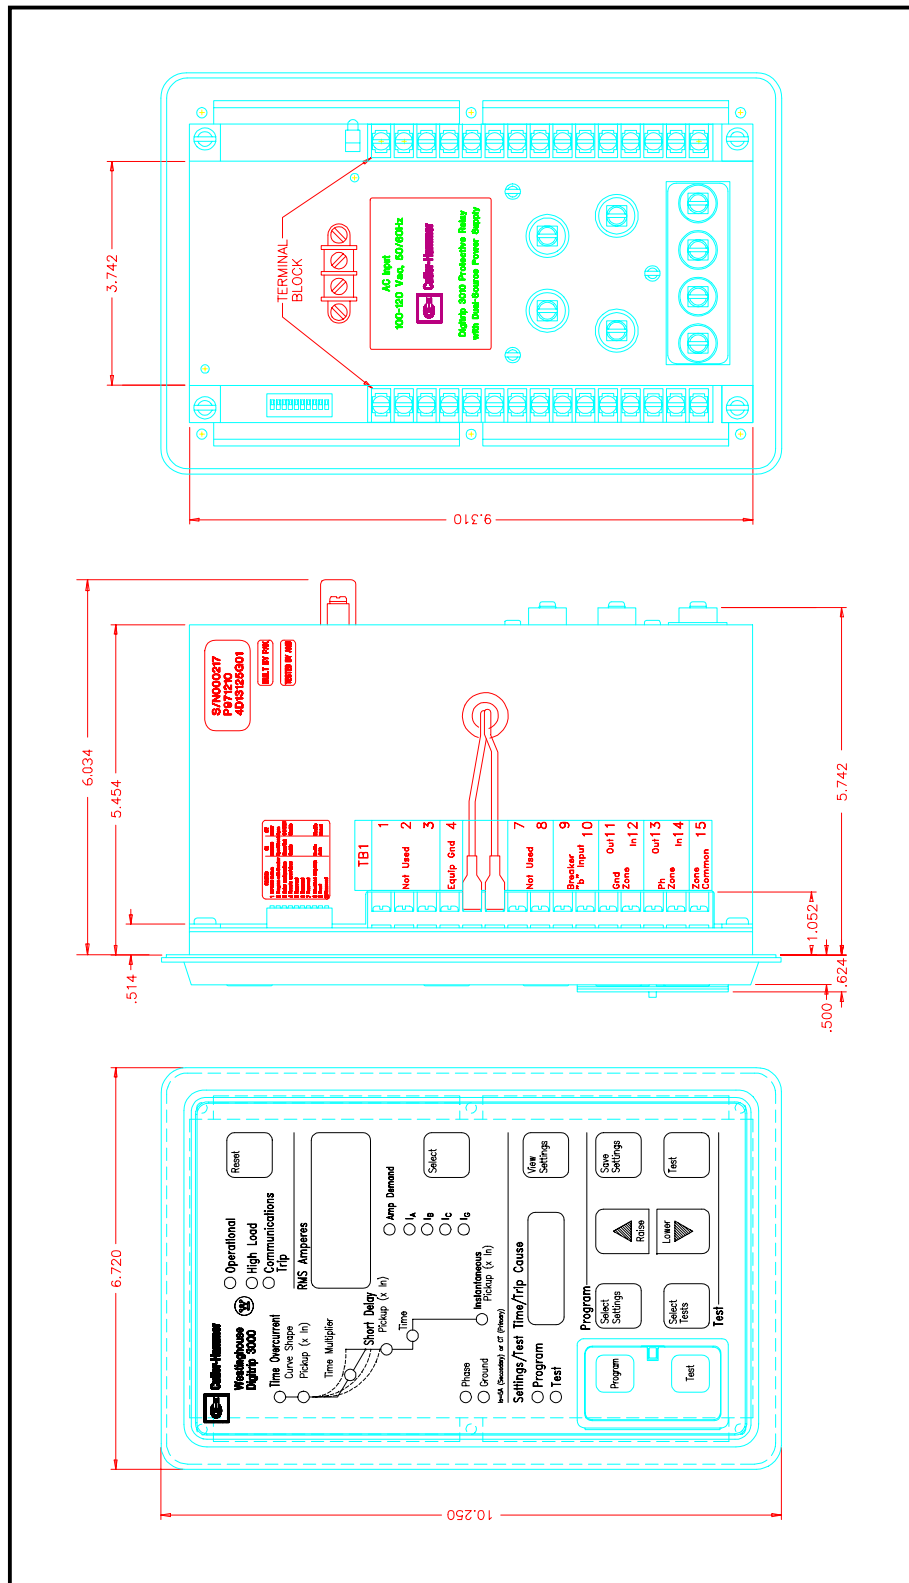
DIGITRIP 3010/3020 DIMENSIONS (INCHES)
